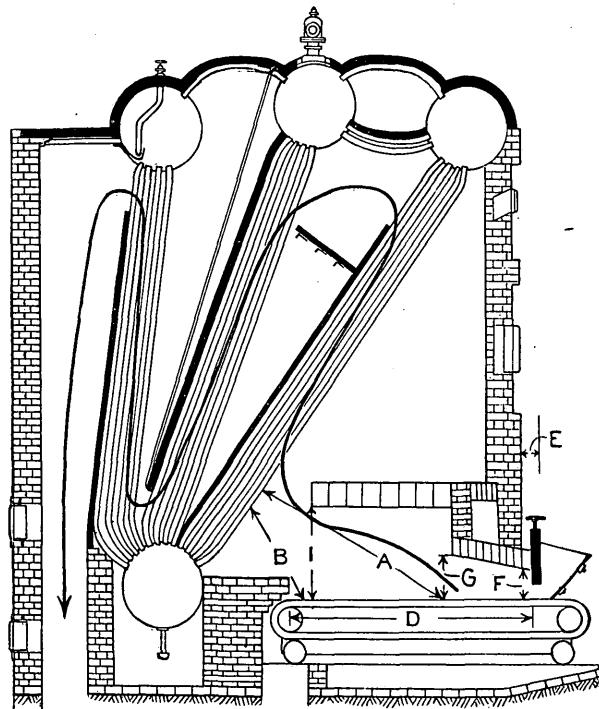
Chain-grate stoker and Stirling boiler.
